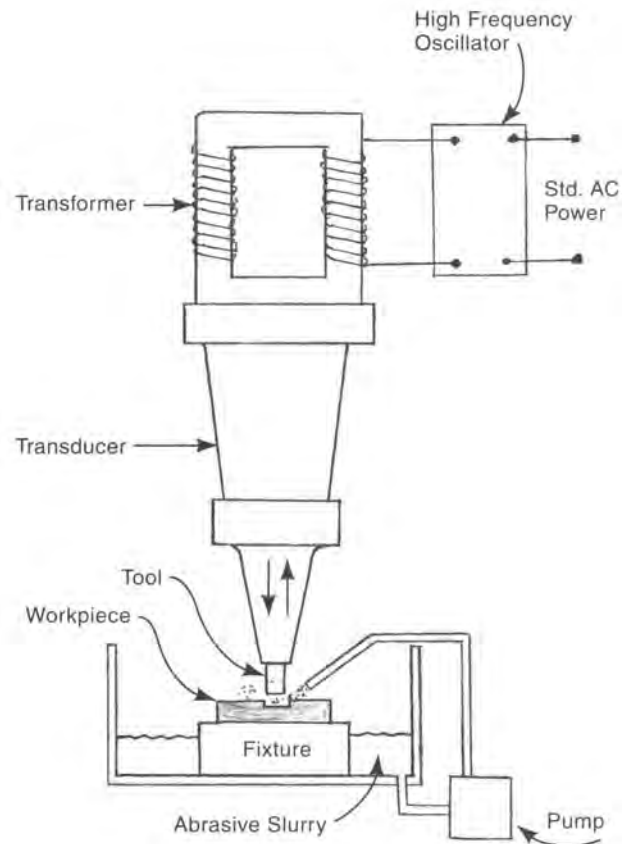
C11 A schematic view of a typical arrangement for ultrasonic machining.
